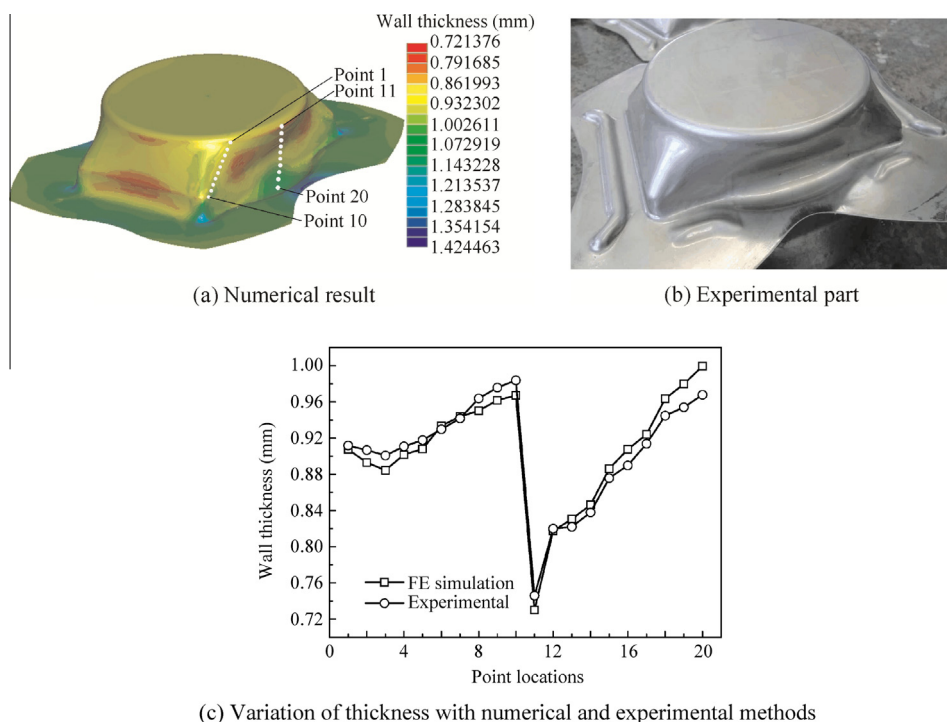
Formed component with drawbeads of $h_1 = 4.0$ mm and $h_2 = 3.0$ mm.
